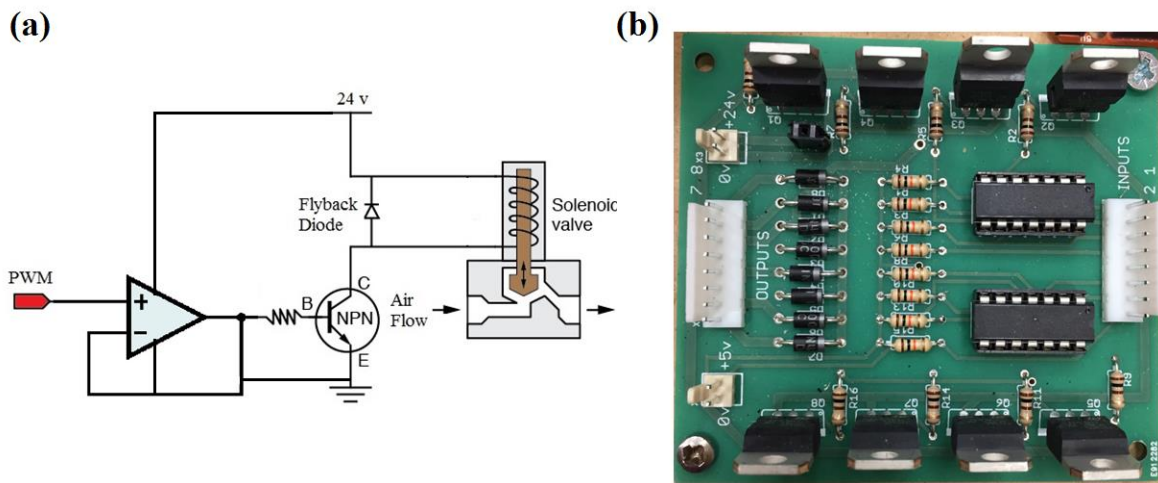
The solenoid valve driver circuit; (a) schematic diagram of single driver circuit and (b) 8-channels driver circuit.
